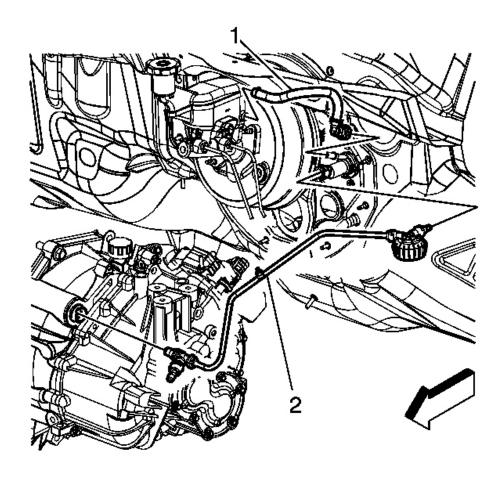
Clutch Master Cylinder Courtesy of GENERAL MOTORS CORP.
